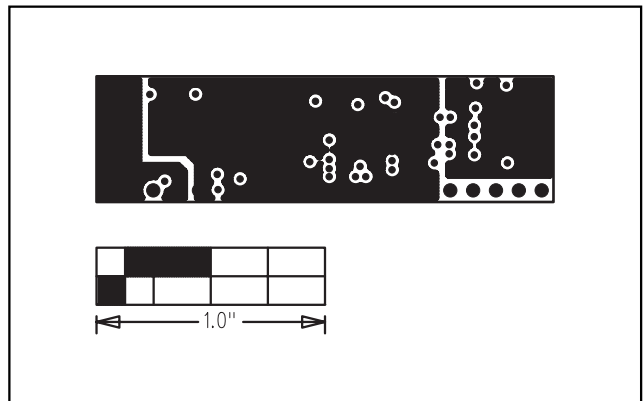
MAX5065 EV Kit PC Board Layout—GND, PGND, and VOUT (Layer 3)
